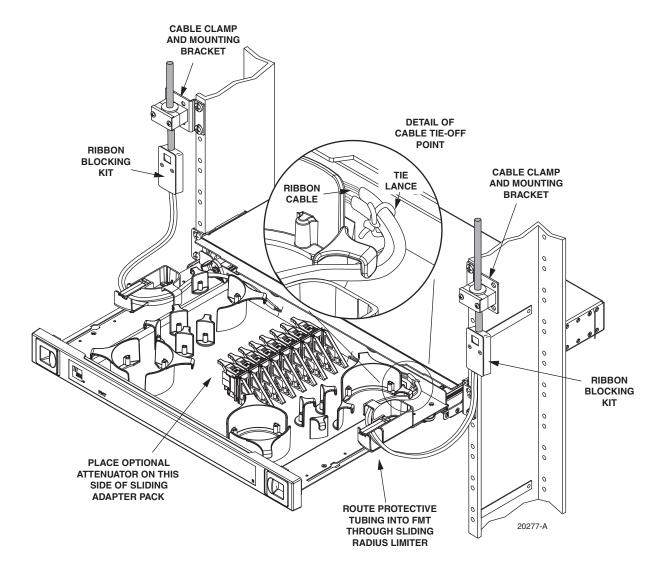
Routing and Securing Cable - Typical Configuration for Ribbon Cable
